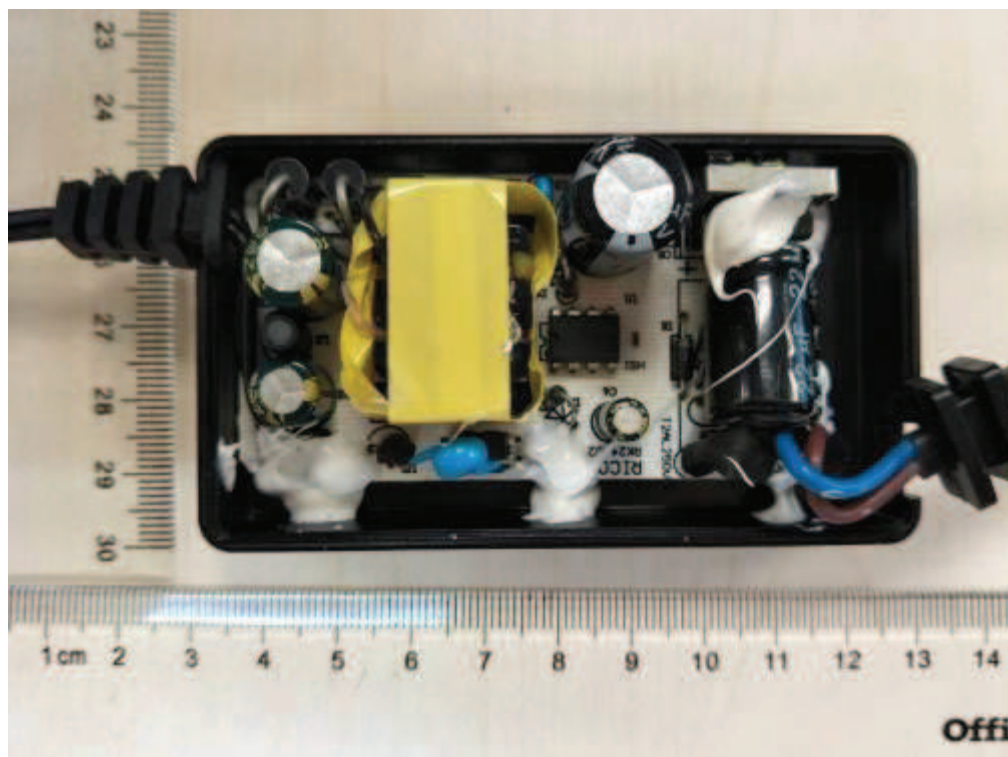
Internal view of RKP-zzxxxxxyyCD-5
